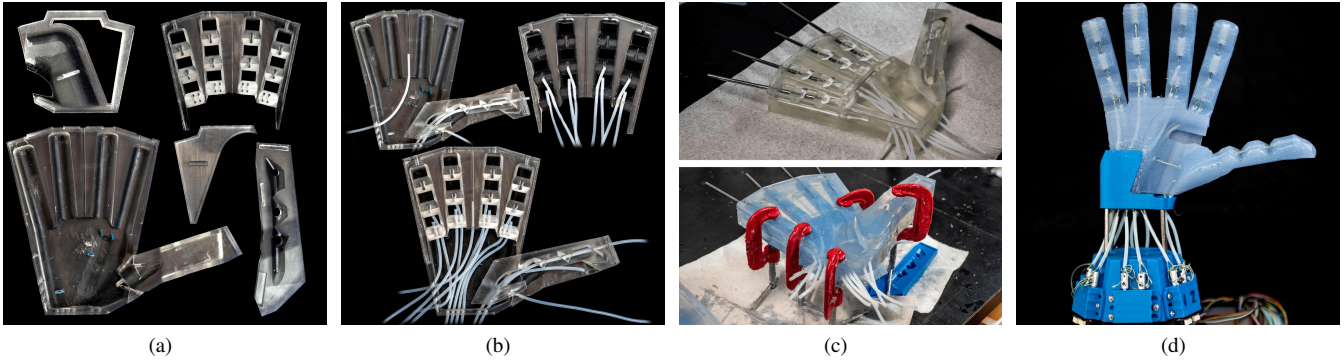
(a) First stage of fabrication: 3D printing of the mold parts. Shown: mold base, finger mid-layer, thumb lid, palm surface piece, and palm lid. (b) Second stage of fabrication: Tendon routing for the fingers and thumb actuation. From top left, clock-wise: first layer of routing, second layer of routing, combined first and second layer. (c) Third stage of fabrication: Casting the gripper using full mold assembly, silicone, and clamps. Top: fully assembled mold. Bottom: mold after the casting process. (d) Final stage of the fabrication: Clean-up of the hand, assembly of the gripper with the base.
